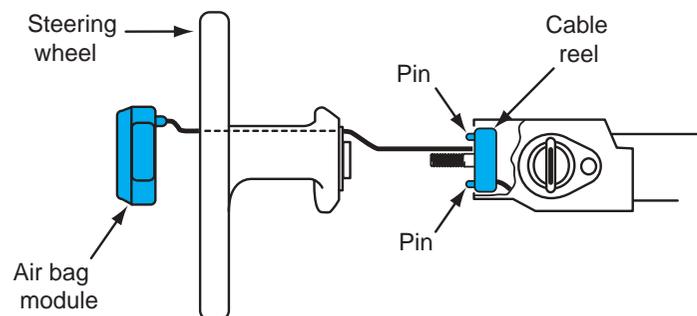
Proper alignment of the steering wheel openings and cable reel pins.
